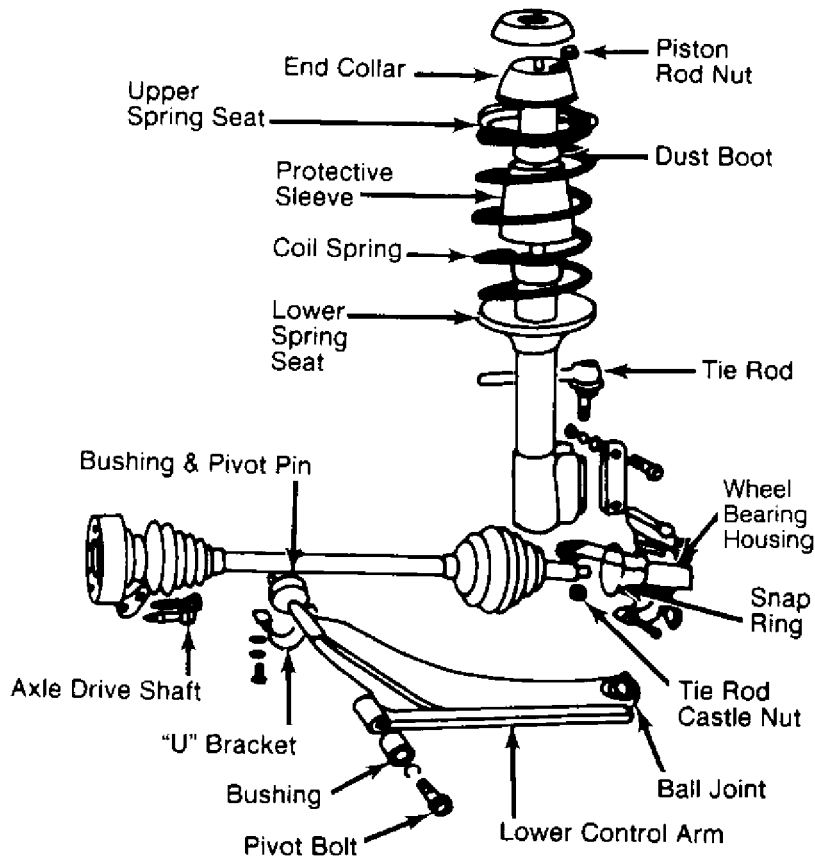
Exploded View of Suspension (Exc. Jetta, Golf & GTI)
